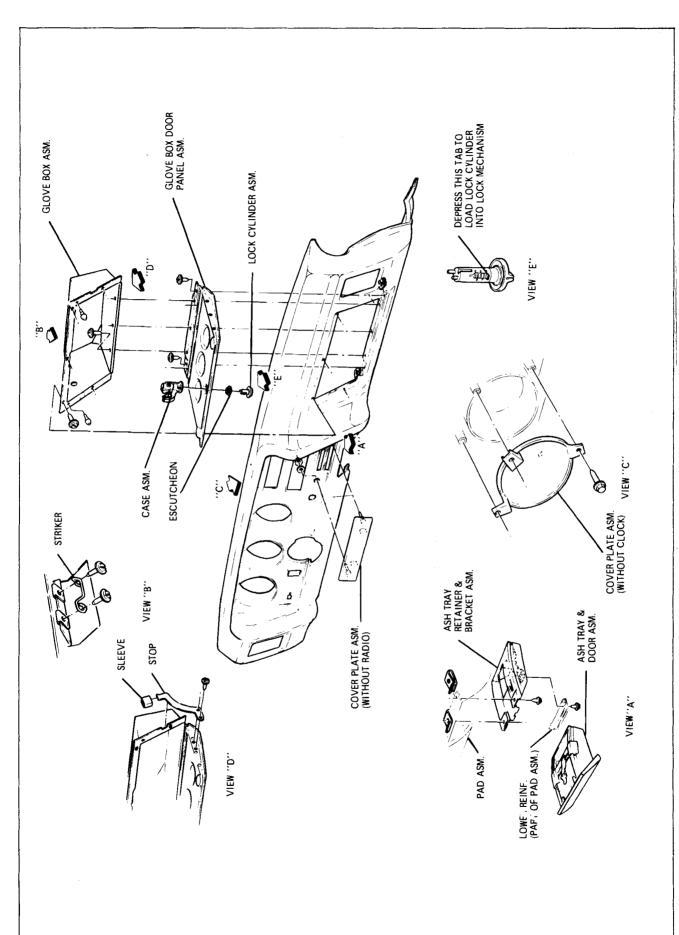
A Series Instrument Panel Pad Attaching Parts
